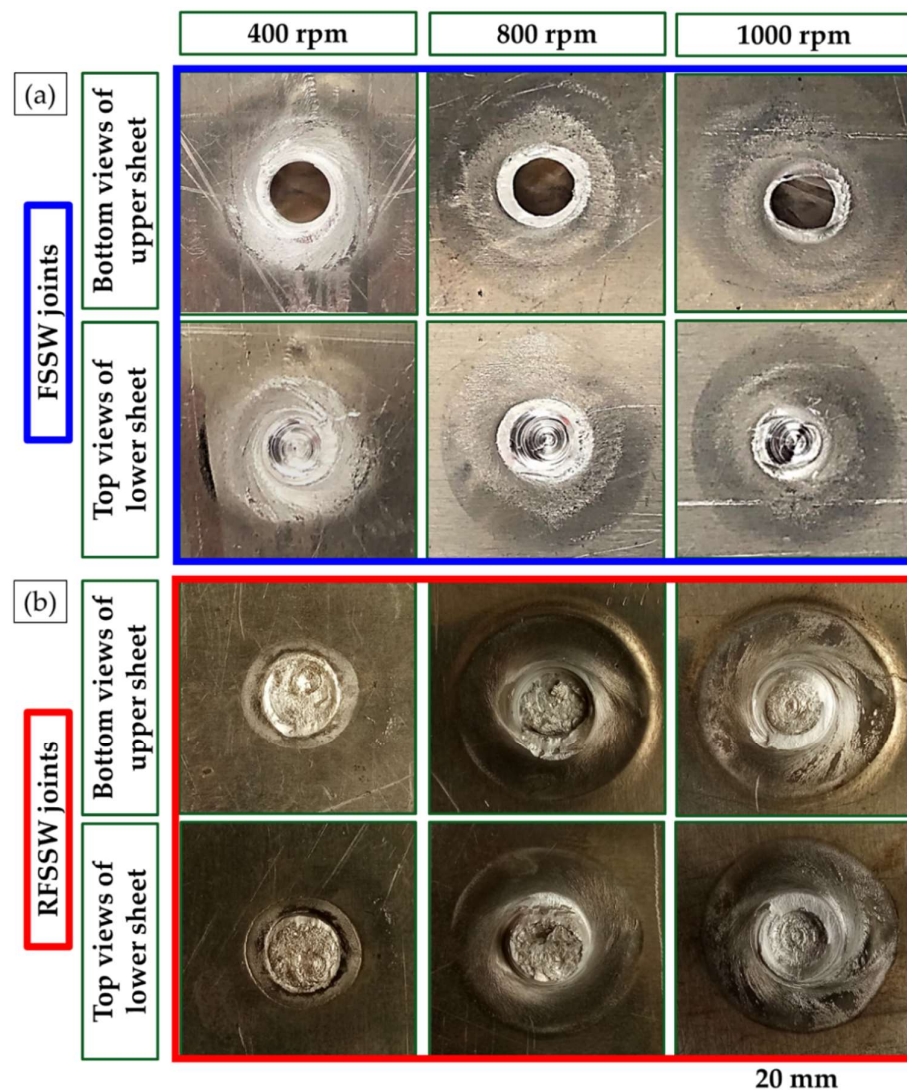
Photographs of the joints after tensile shear testing for (a) the FSSW lap joints welded at a dwell time of 3 s and rotation speeds of 400, 800, and 1000 rpm [36] and (b) the RFSSW joints welded at the same conditions and refilled at a 400 rpm AA2011-T6 consumable rod rotation speed and a 1 mm/min feed rate.
